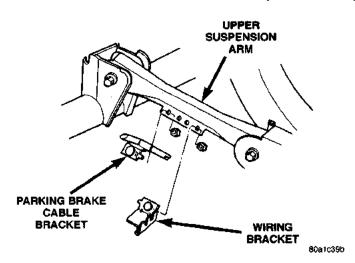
Parking Brake Cable/Bracket And Wiring Bracket
